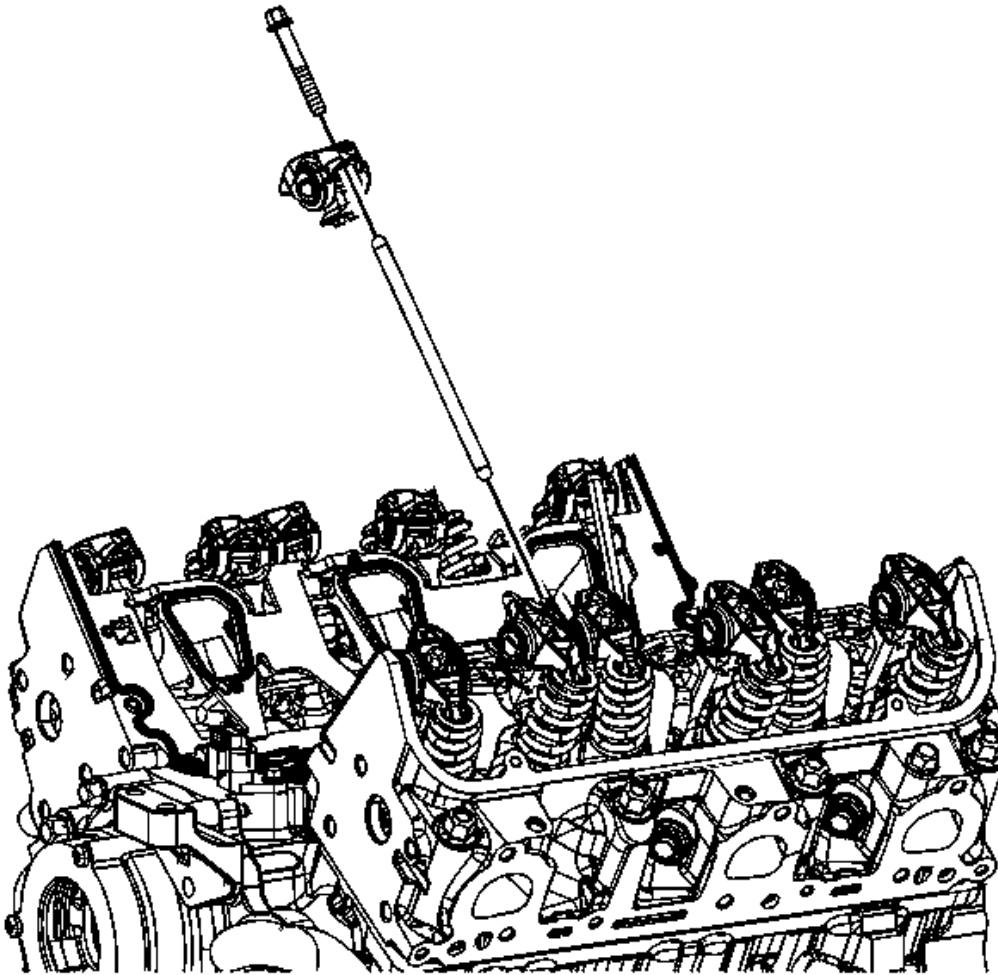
Valve Rocker Arm, Bolt & Push Rod
